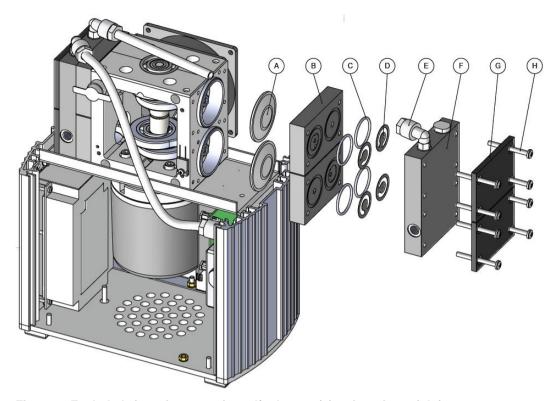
Exploded view of pump unit, 2nd/3rd stage (view from front right)
